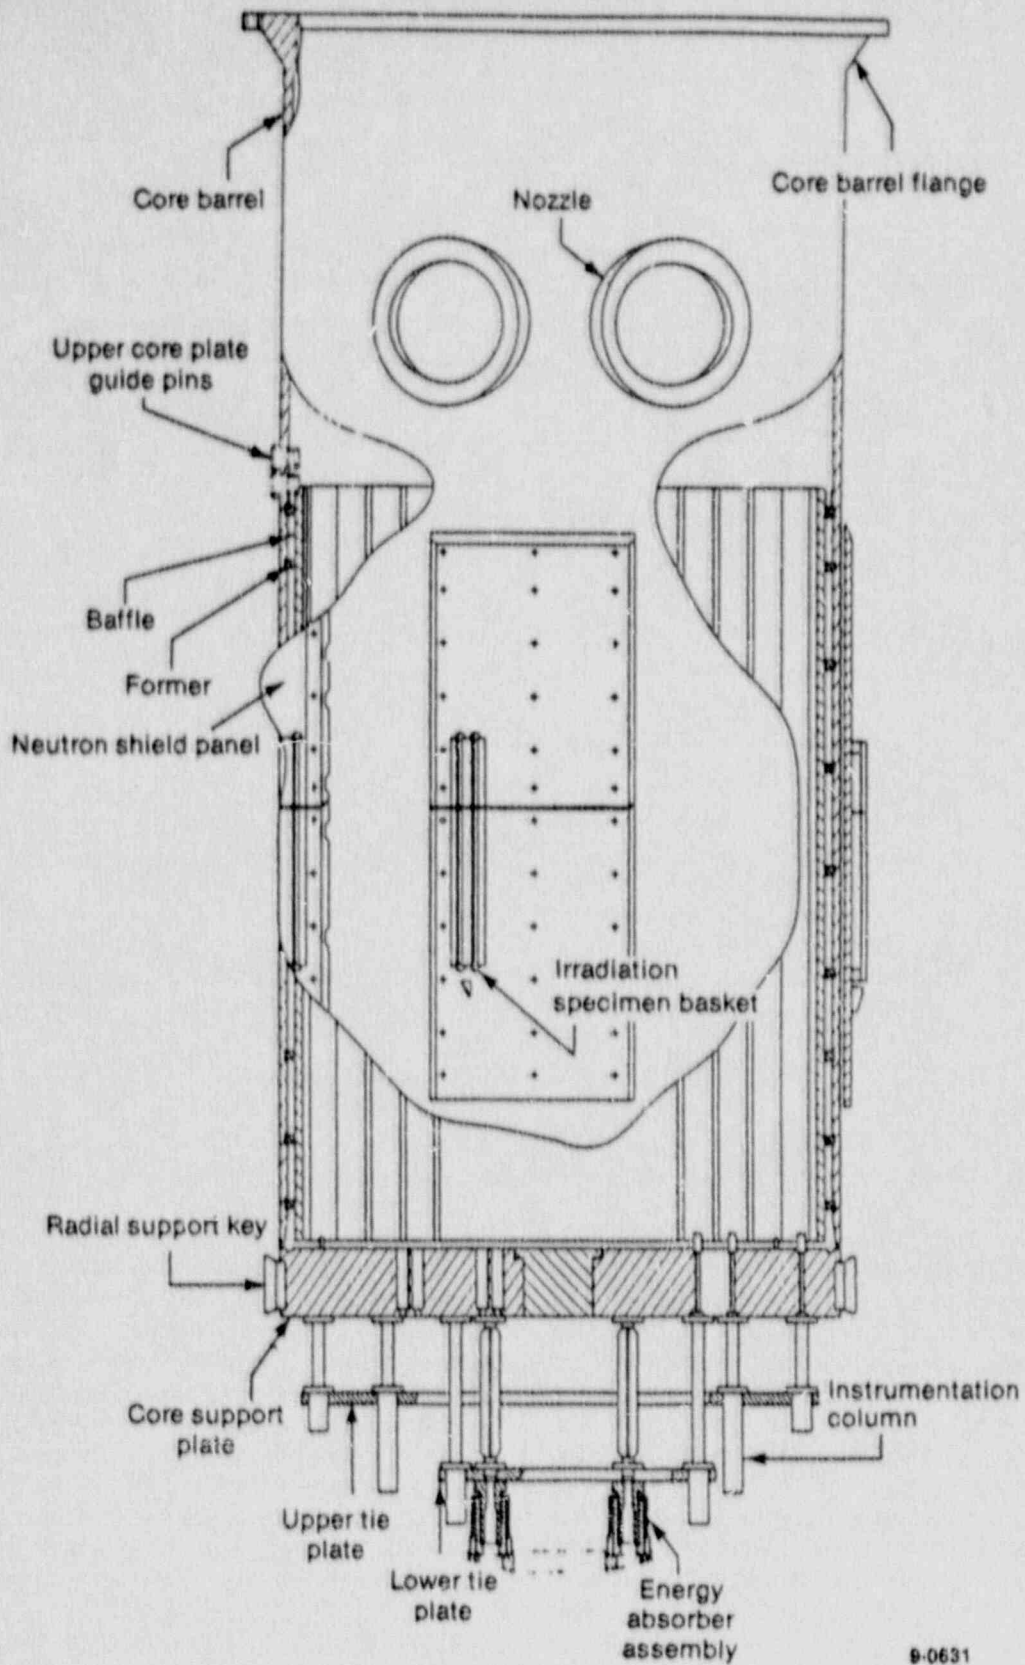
Westinghouse lower core support assembly showing position of neutron shield panel.
